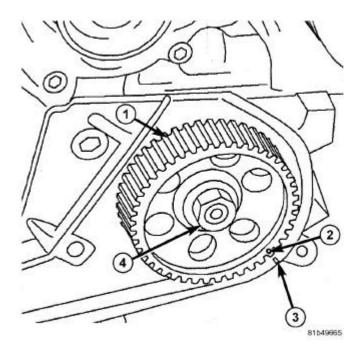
FUEL INJECTION PUMP TIMING MARKS Courtesy of CHRYSLER LLC
